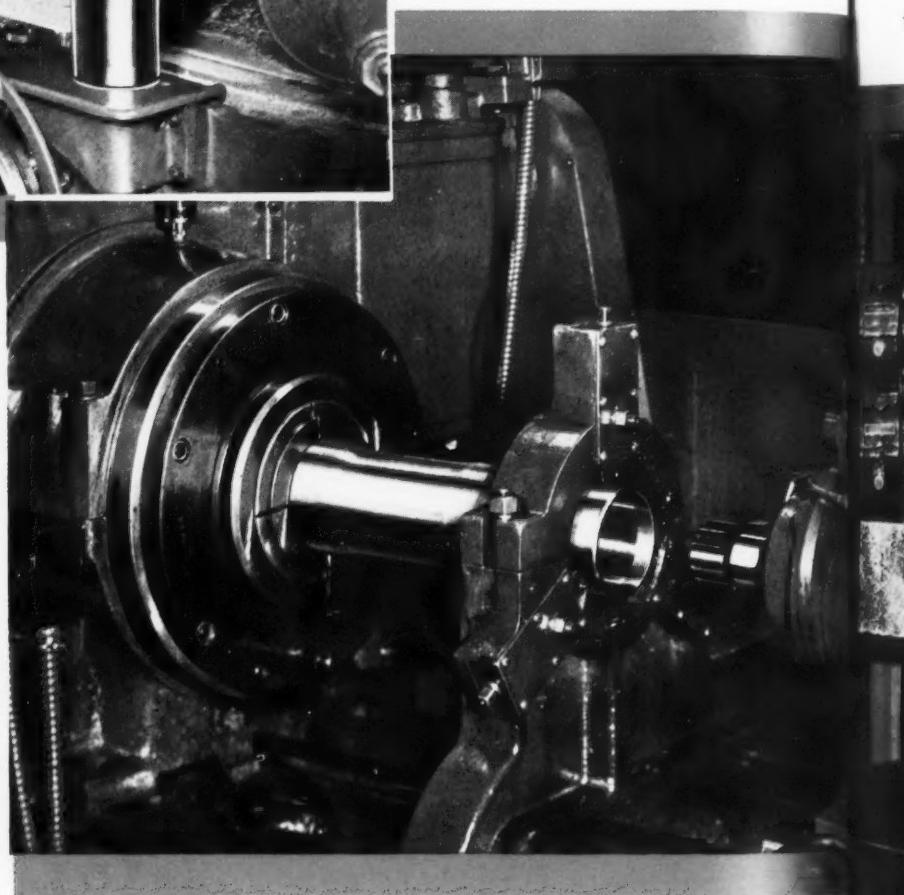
Milling the Threads in One End of an Outer Strut Cylinder on a Standard Thread Milling Machine Provided with an Air Chuck
